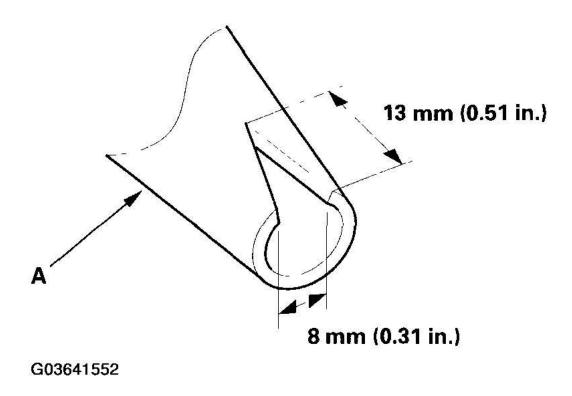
Cutting "V" At End Of Nozzle On Adhesive Cartridge Courtesy of AMERICAN HONDA MOTOR CO., INC.
